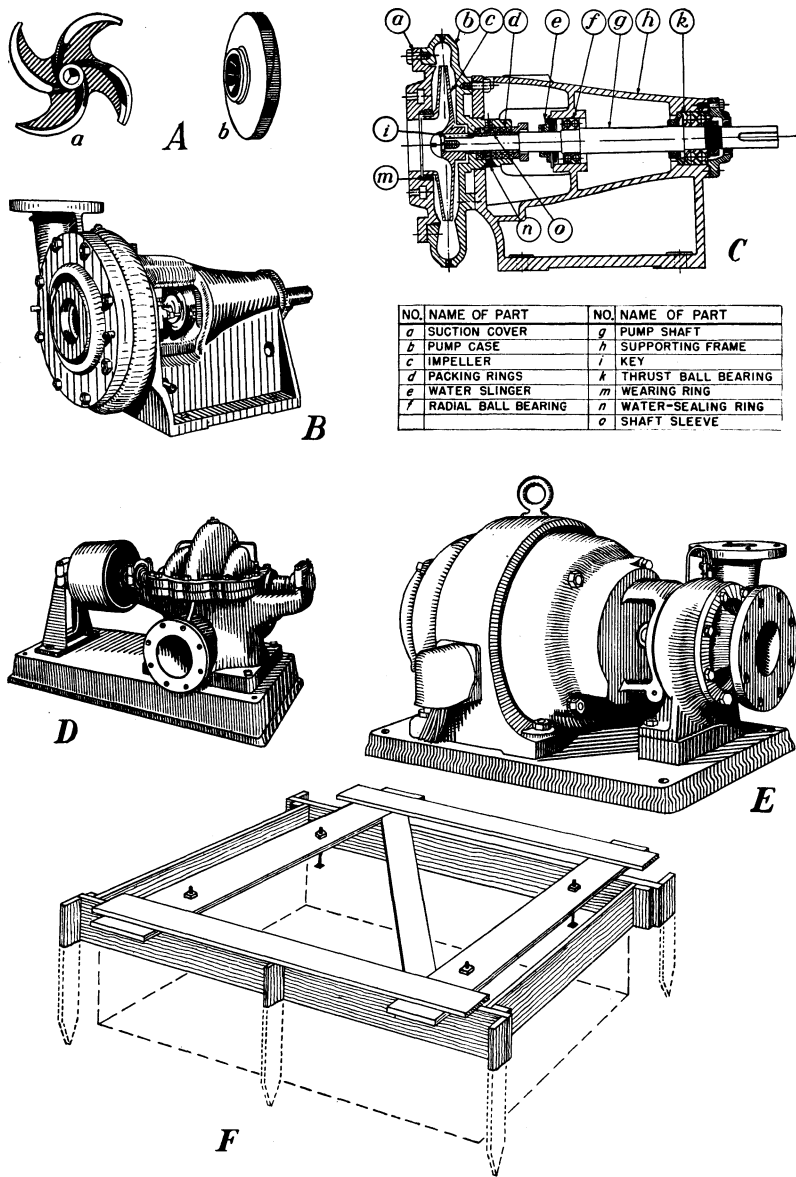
A, Impellers: *a*, Open-type and *b*, closed-type; *B*, single-stage, single-side-suction centrifugal pump for belt drive; *C*, cross section of *B*; *D*, high-grade, well supported, single-stage, double-suction, enclosed-impeller centrifugal pump; *E*, close-coupled, electric-driven centrifugal pump; *F*, frame holding anchor bolts in place on a form for a concrete foundation for *E*.
